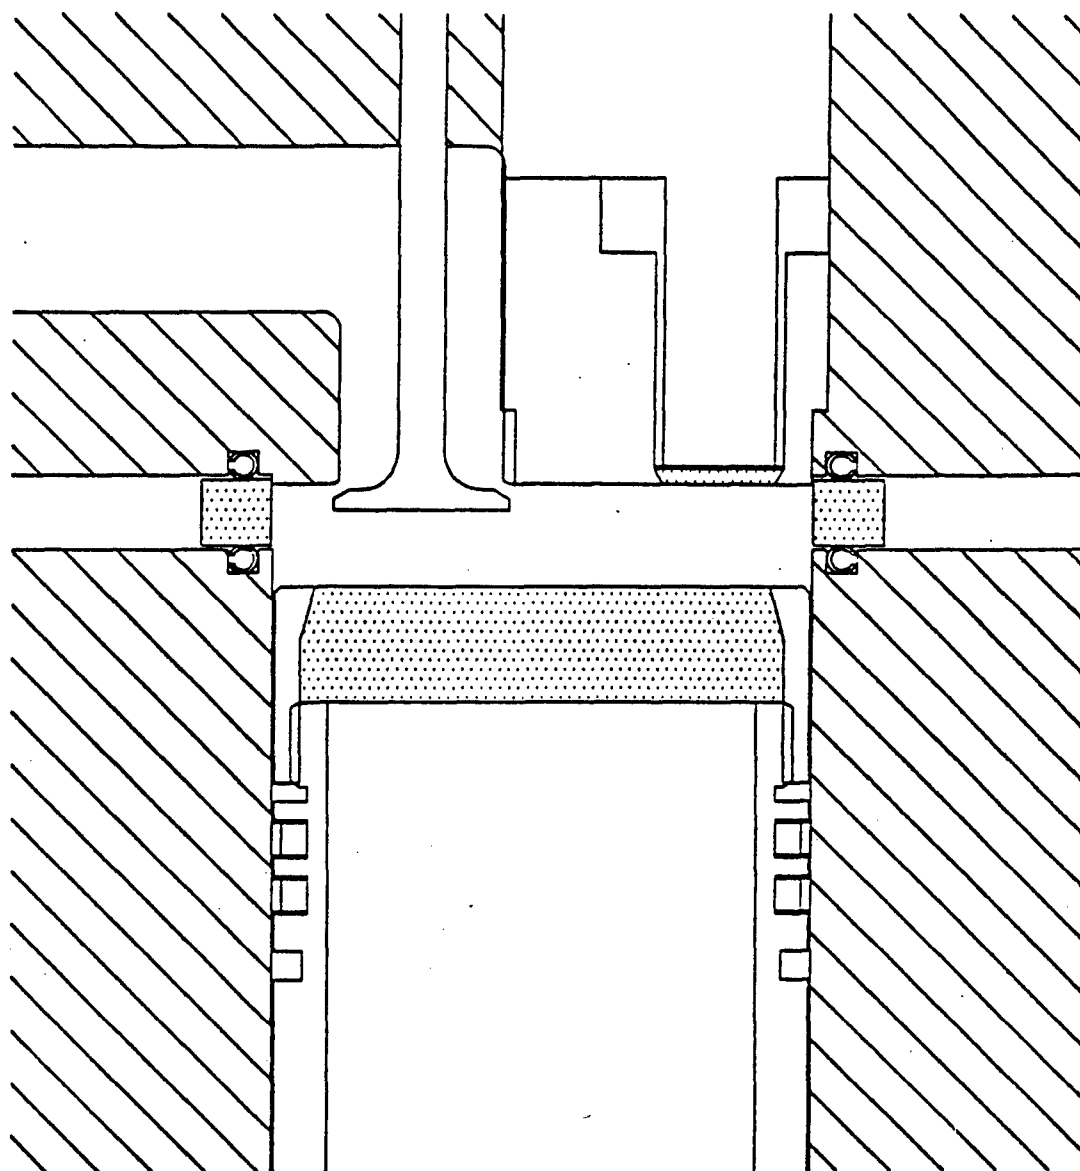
Cross-Section of Clearance Volume Showing Location of Windows (Areas With Dots), Valves, and Instrumentation Port
